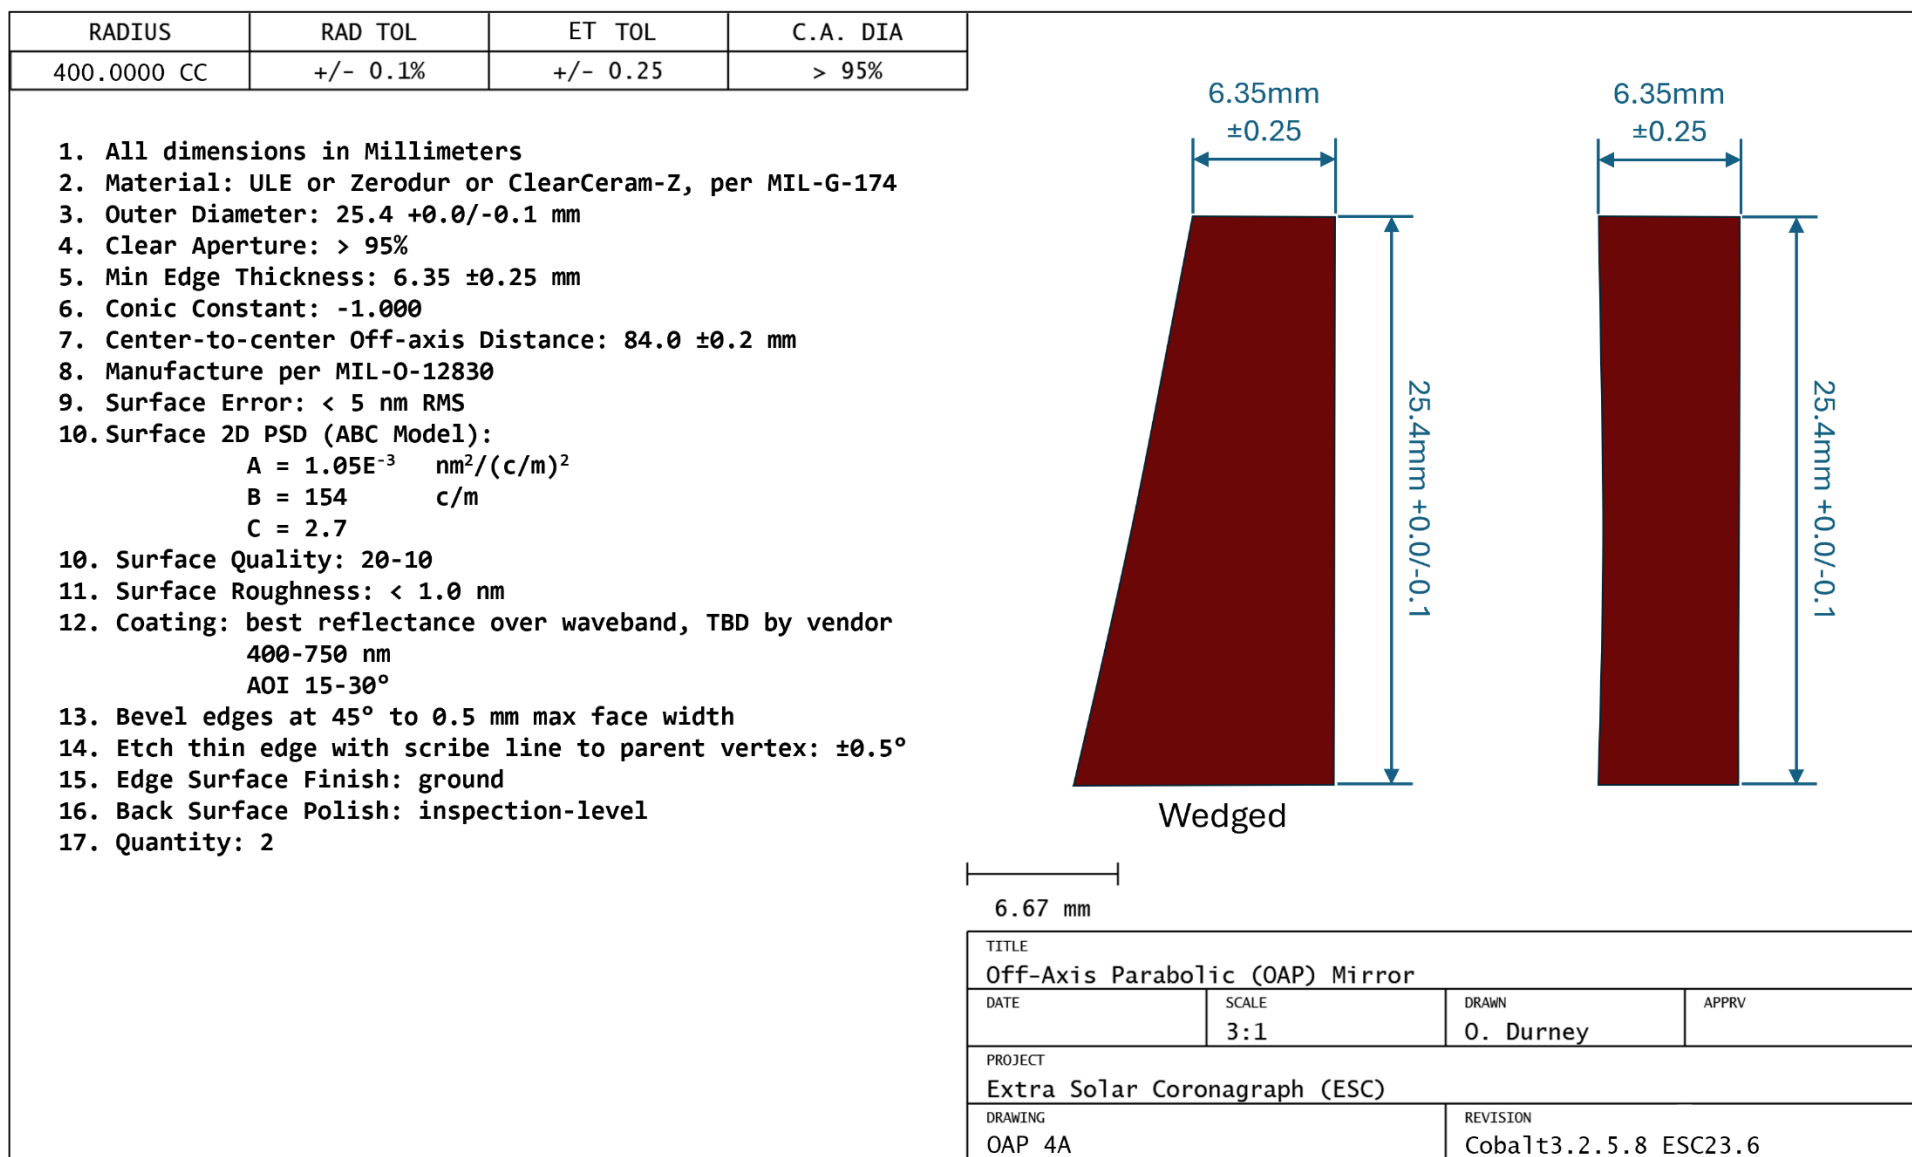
Off-axis parabolic mirror, OAP 4A drawing
